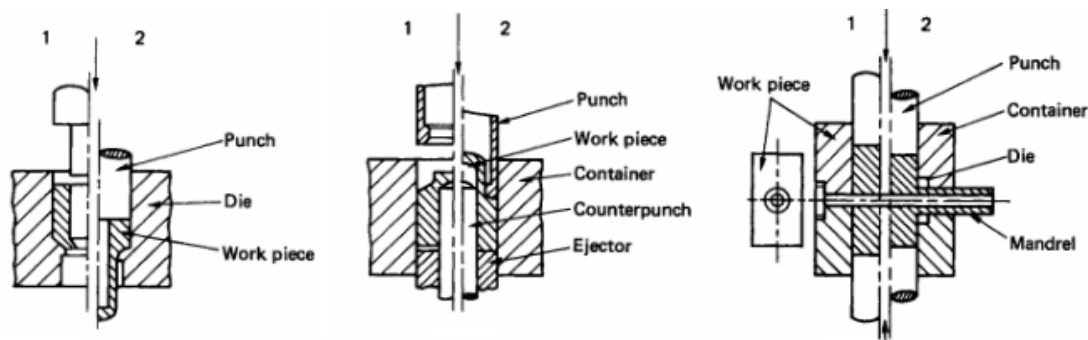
Forward extrusion of tube, Backward (reverse) extrusion of tube and Side extrusion of tube [13].
